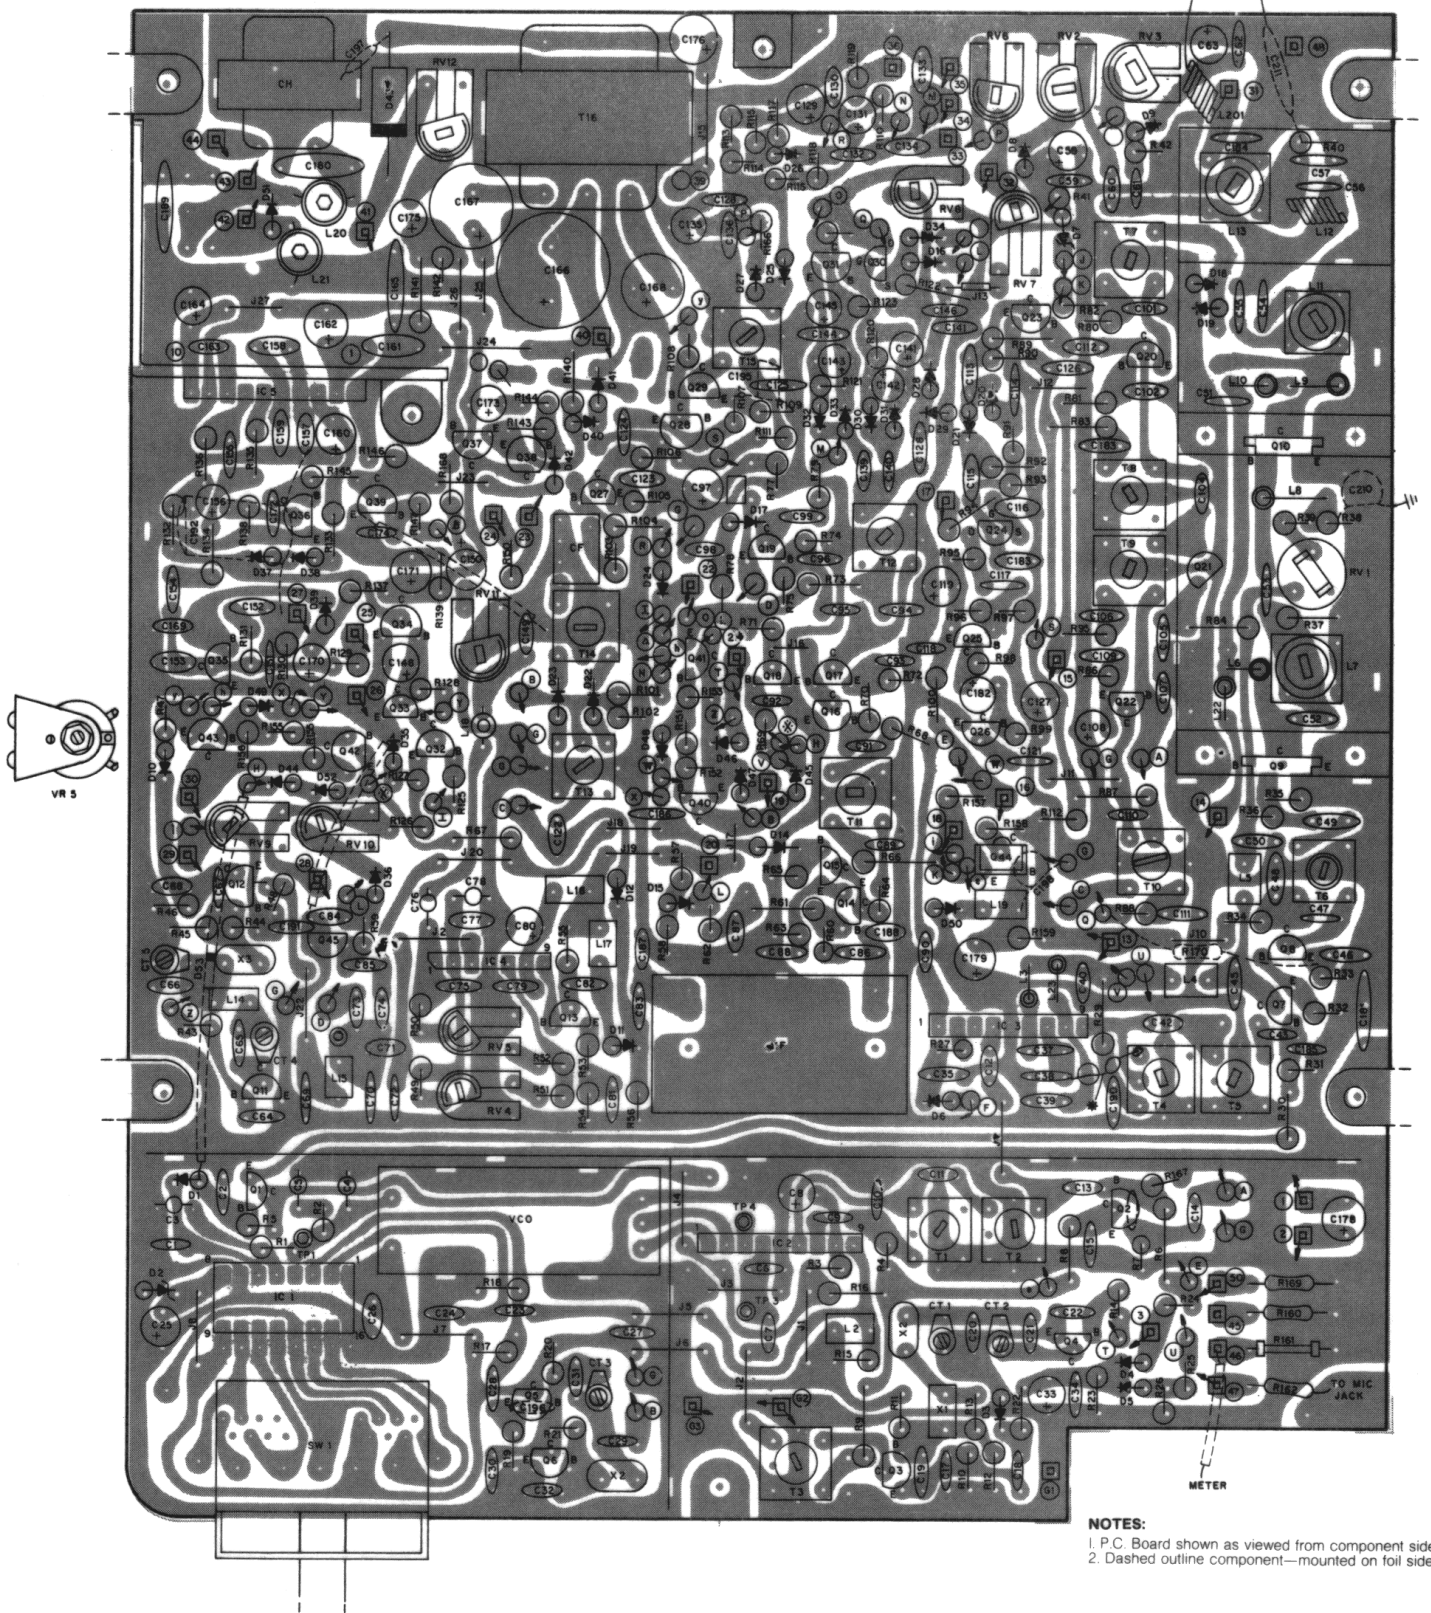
Component Outline Main P.C. Board, Model 2705
